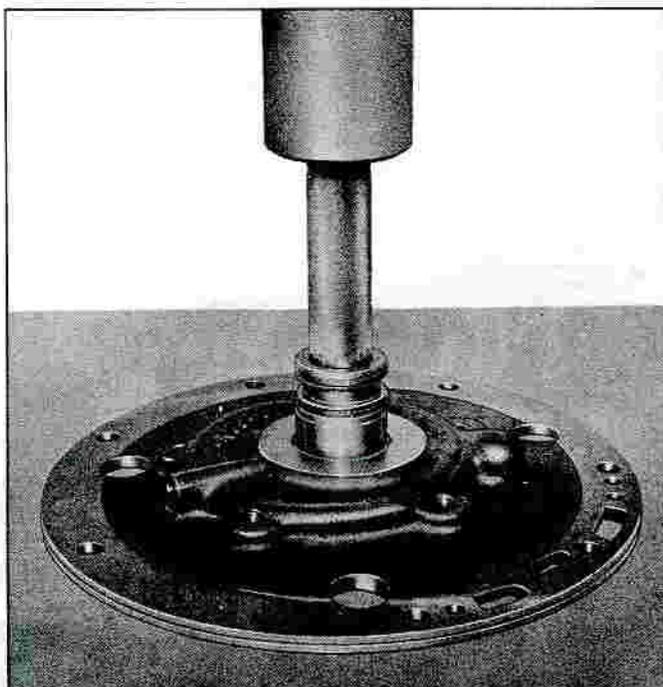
E-34—Installing Front Pump Bushing with J-8360-5
